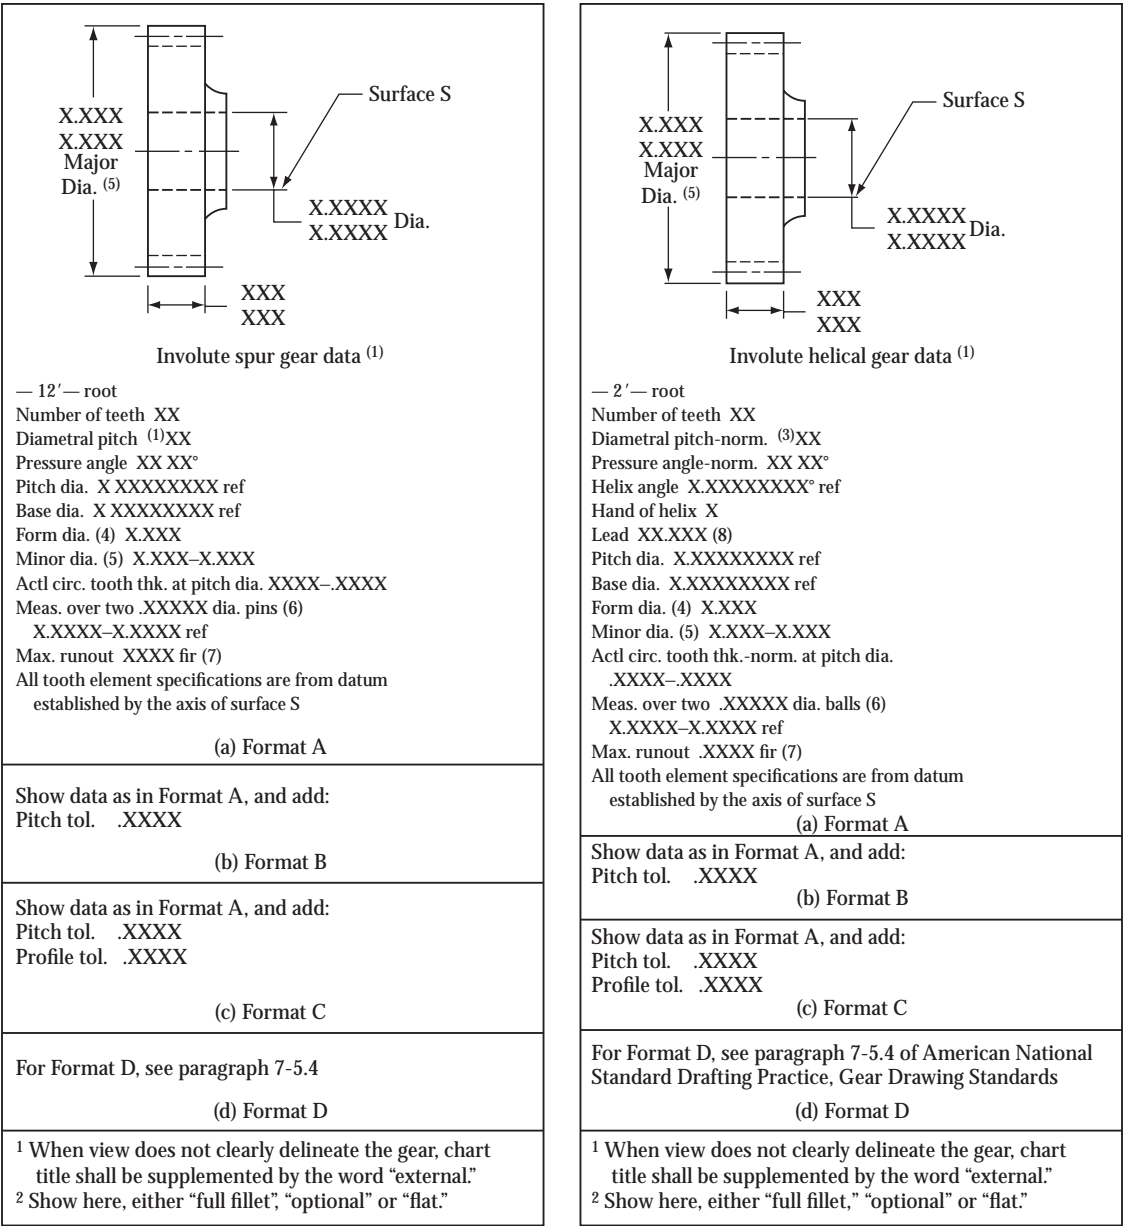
Standard drawing formats for spur and helical gears.
